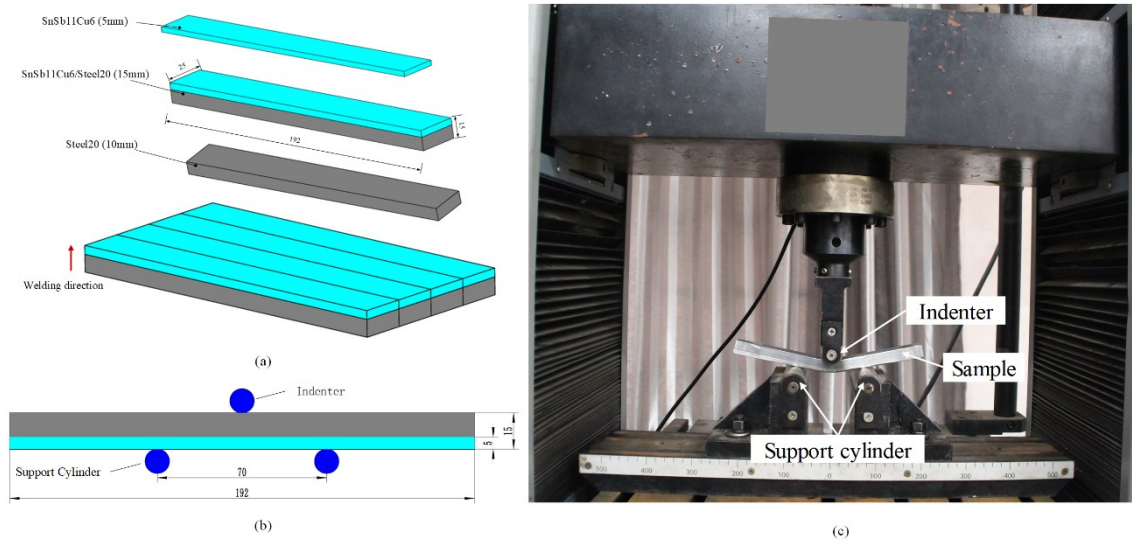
(a) Dimensions of tensile specimen , (b)Schematic diagram of 3PB, and (c) Electronic universal testing machine
